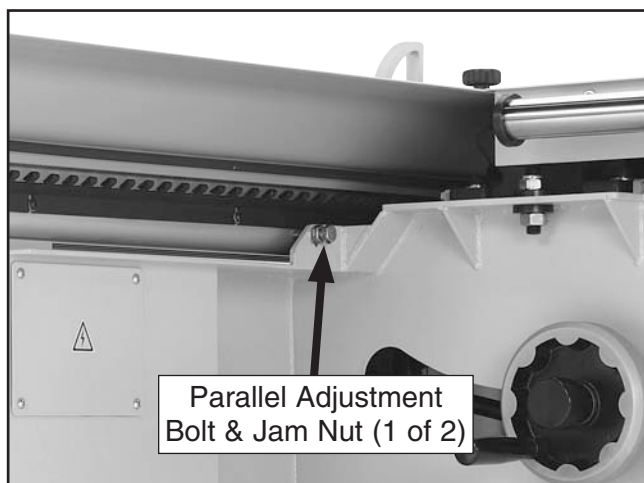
Sliding table parallel adjustment bolt (1 of 2).
